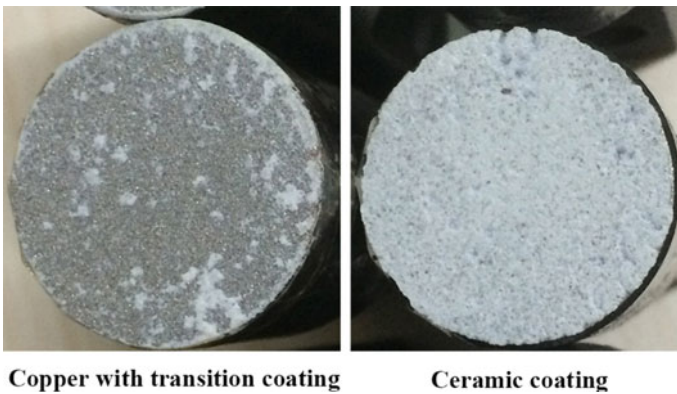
Broken surfaces of the DL coating sample after tensile test. (Color figure online)
